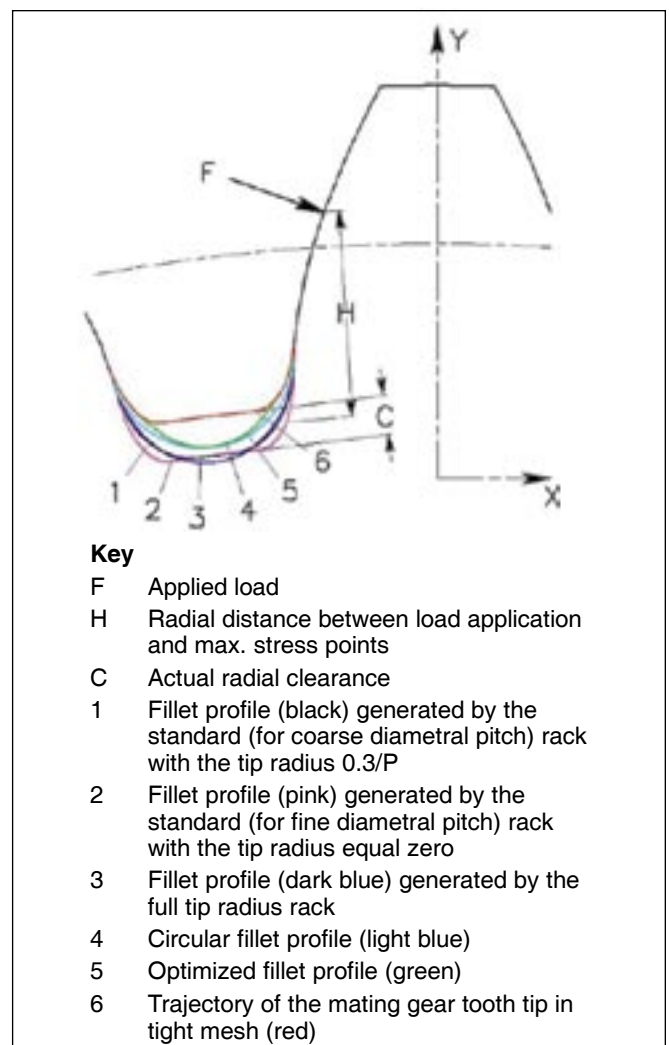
Standard gear tooth with different fillets; X and Y coordinates at the center of the gear.
